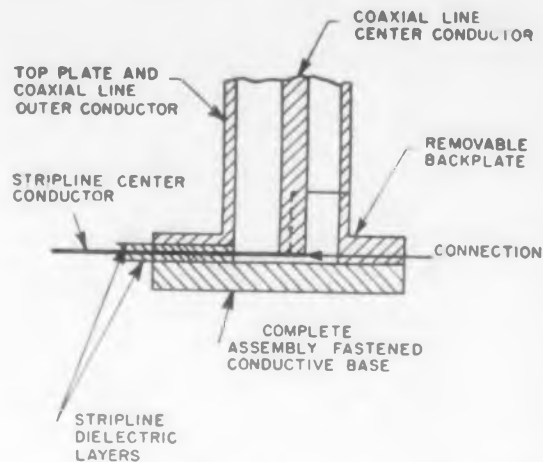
Assembly drawing of right-angle strip line to coaxial line adapter.
